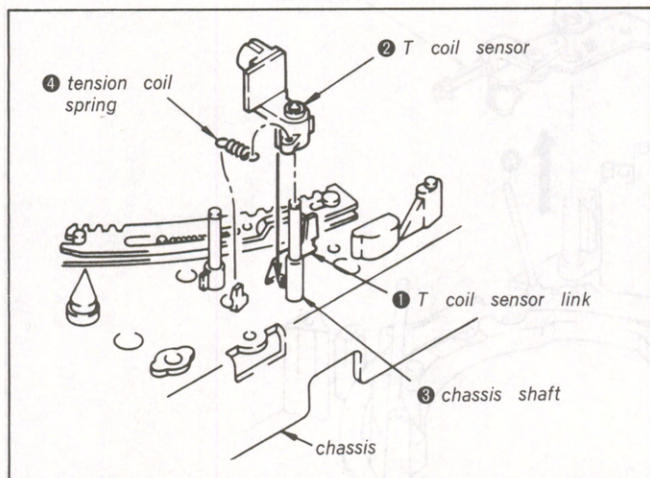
Mounting the T coil sensor link and the T coil sensor.
